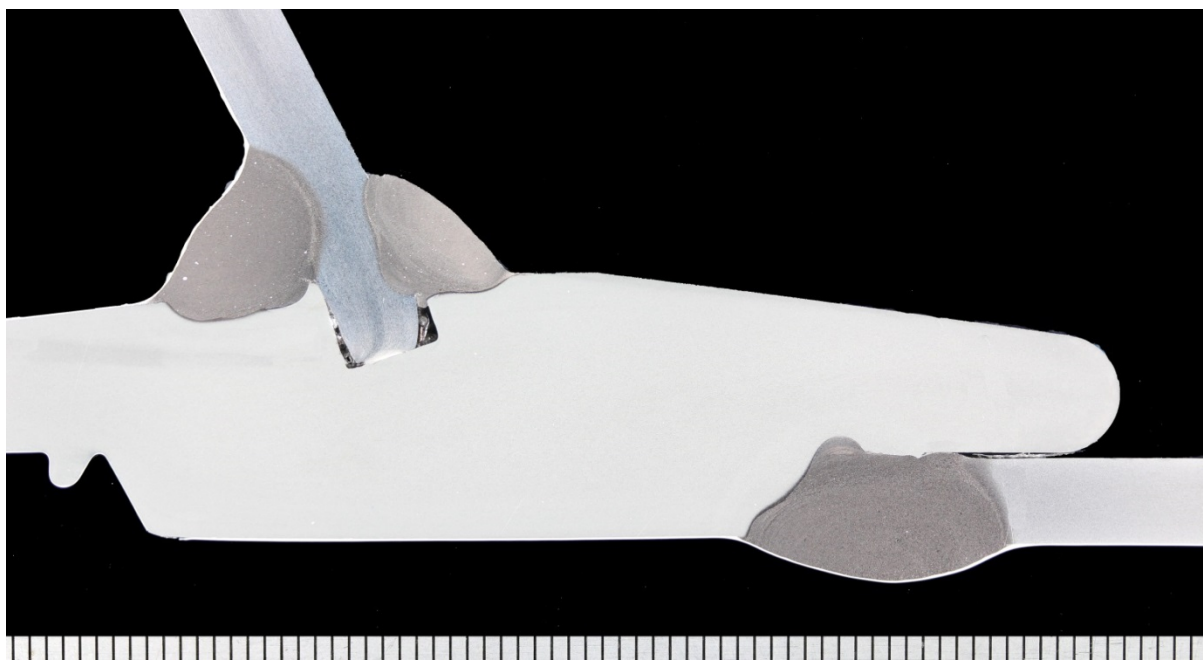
J3564 Sample W-01 from the rear weld.
